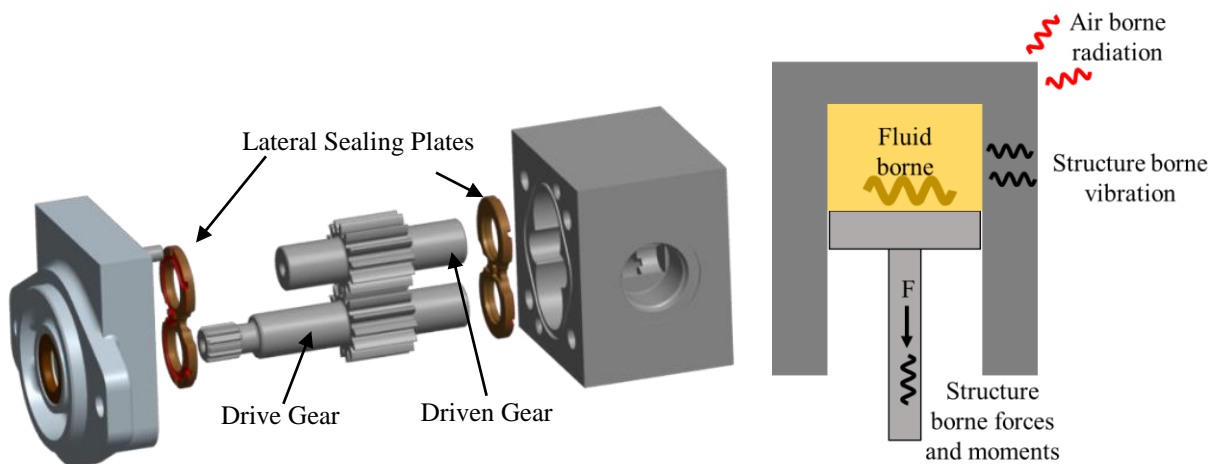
a) Example EGM. b) Noise sources in a displacement machine.
